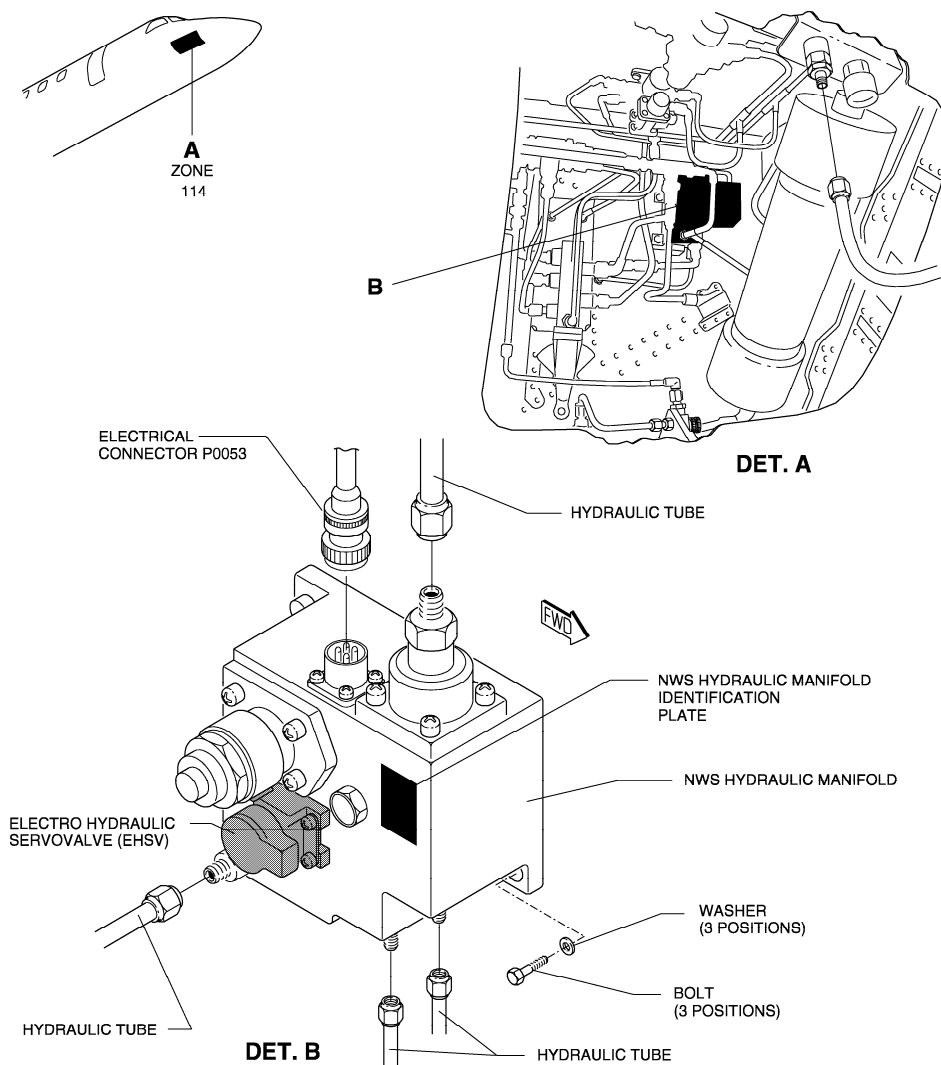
NOSE WHEEL STEERING (NWS) HYDRAULIC MANIFOLD
